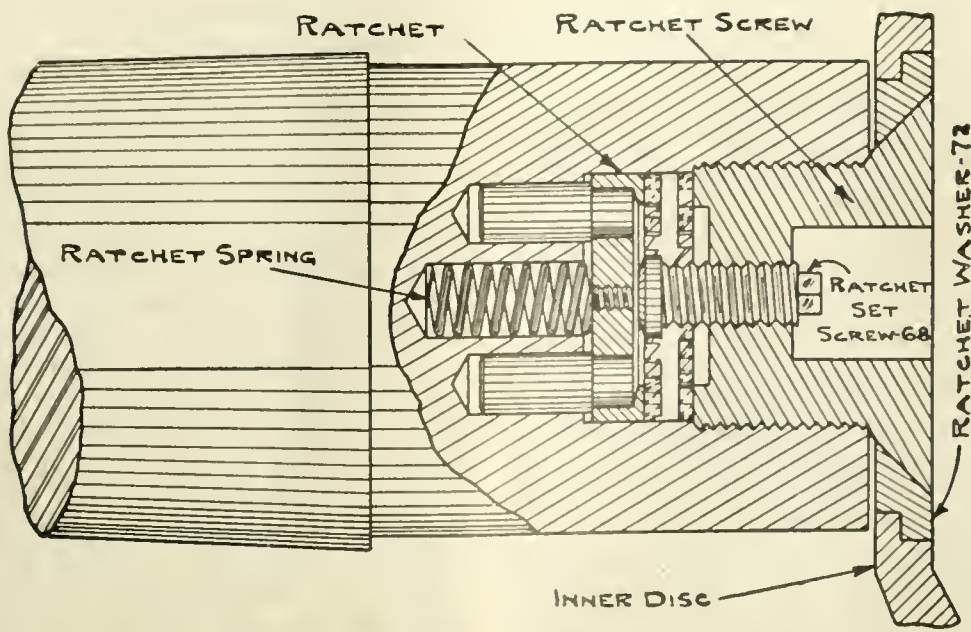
METHOD OF SECURING CRUSHING-DISC TO INNER SHAFT
